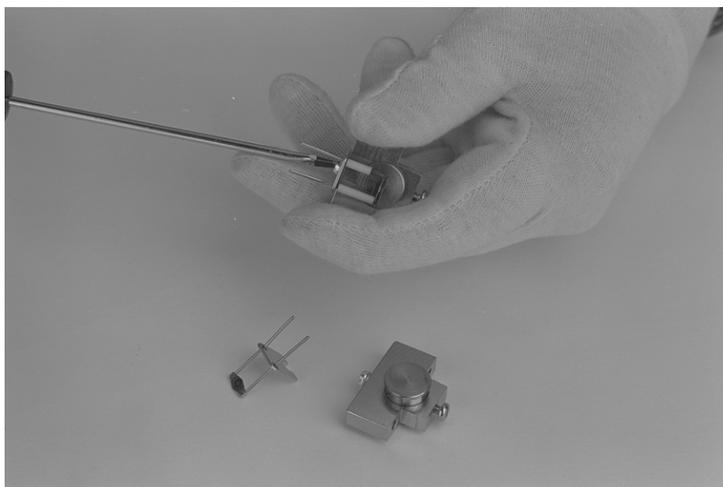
Mounting plate removed from body (CI and combined sources)
